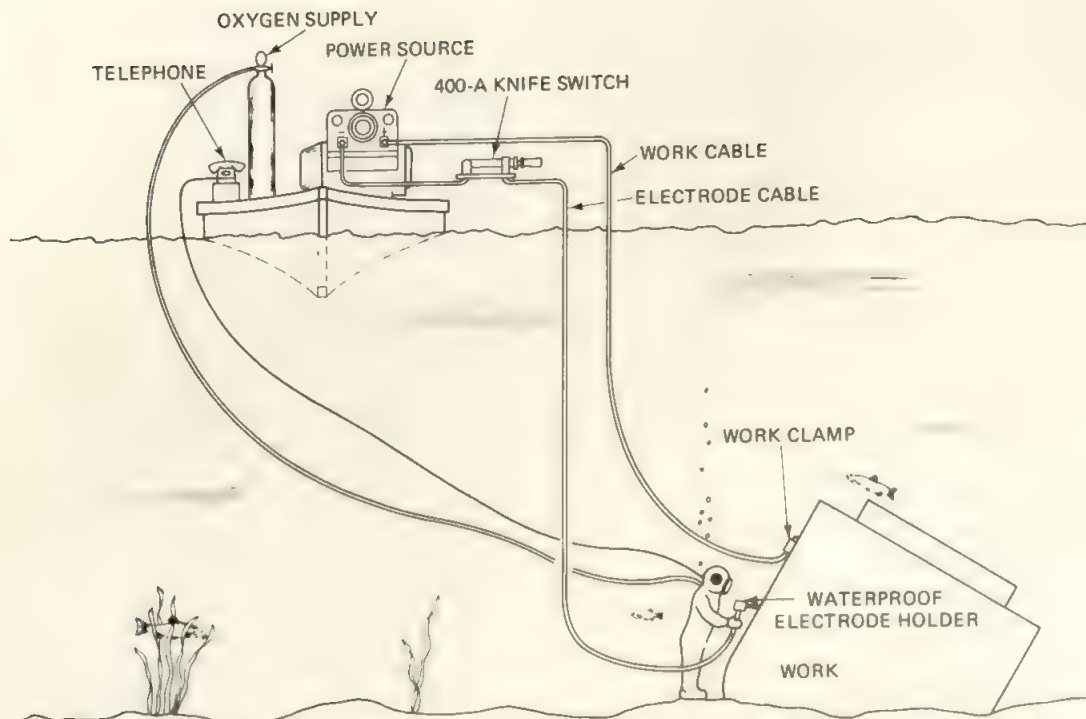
Arrangements for underwater welding in the wet.
